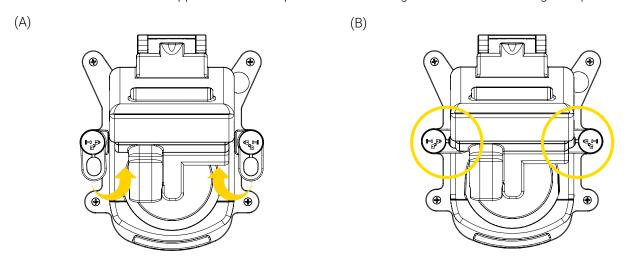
Locking the support bracket with a bottom micro disc (top view)
